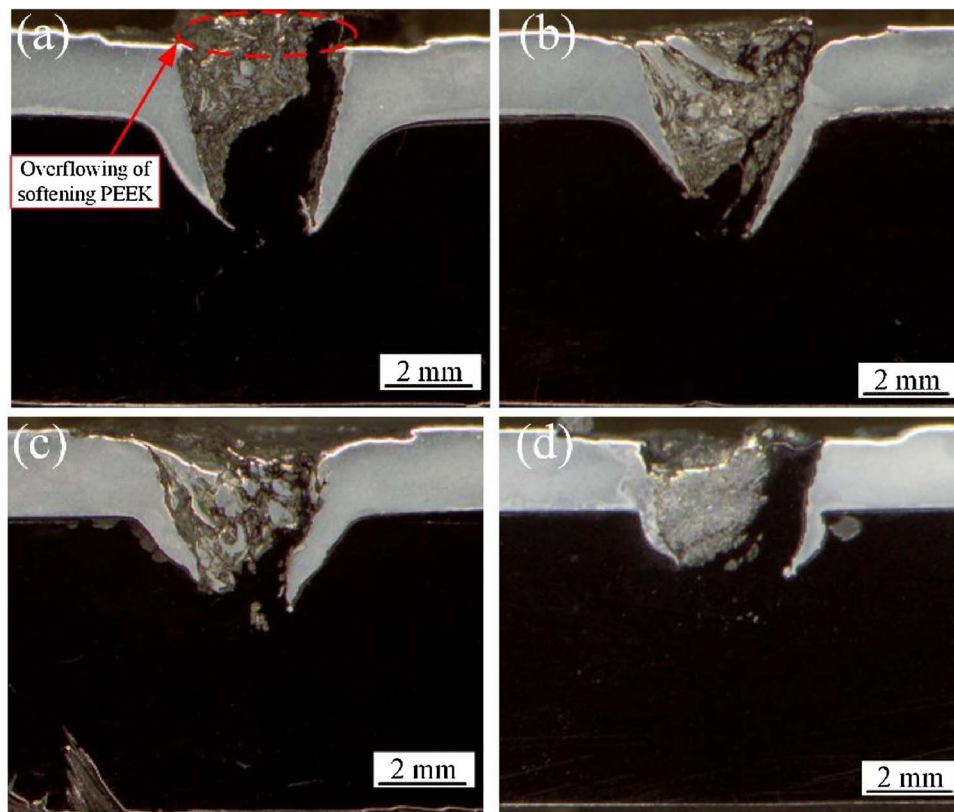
Joint formation in cross section of the hybrid joints: (a) 30 mm/min, (b) 50 mm/min, (c) 70 mm/min and (d) 90 mm/min.
